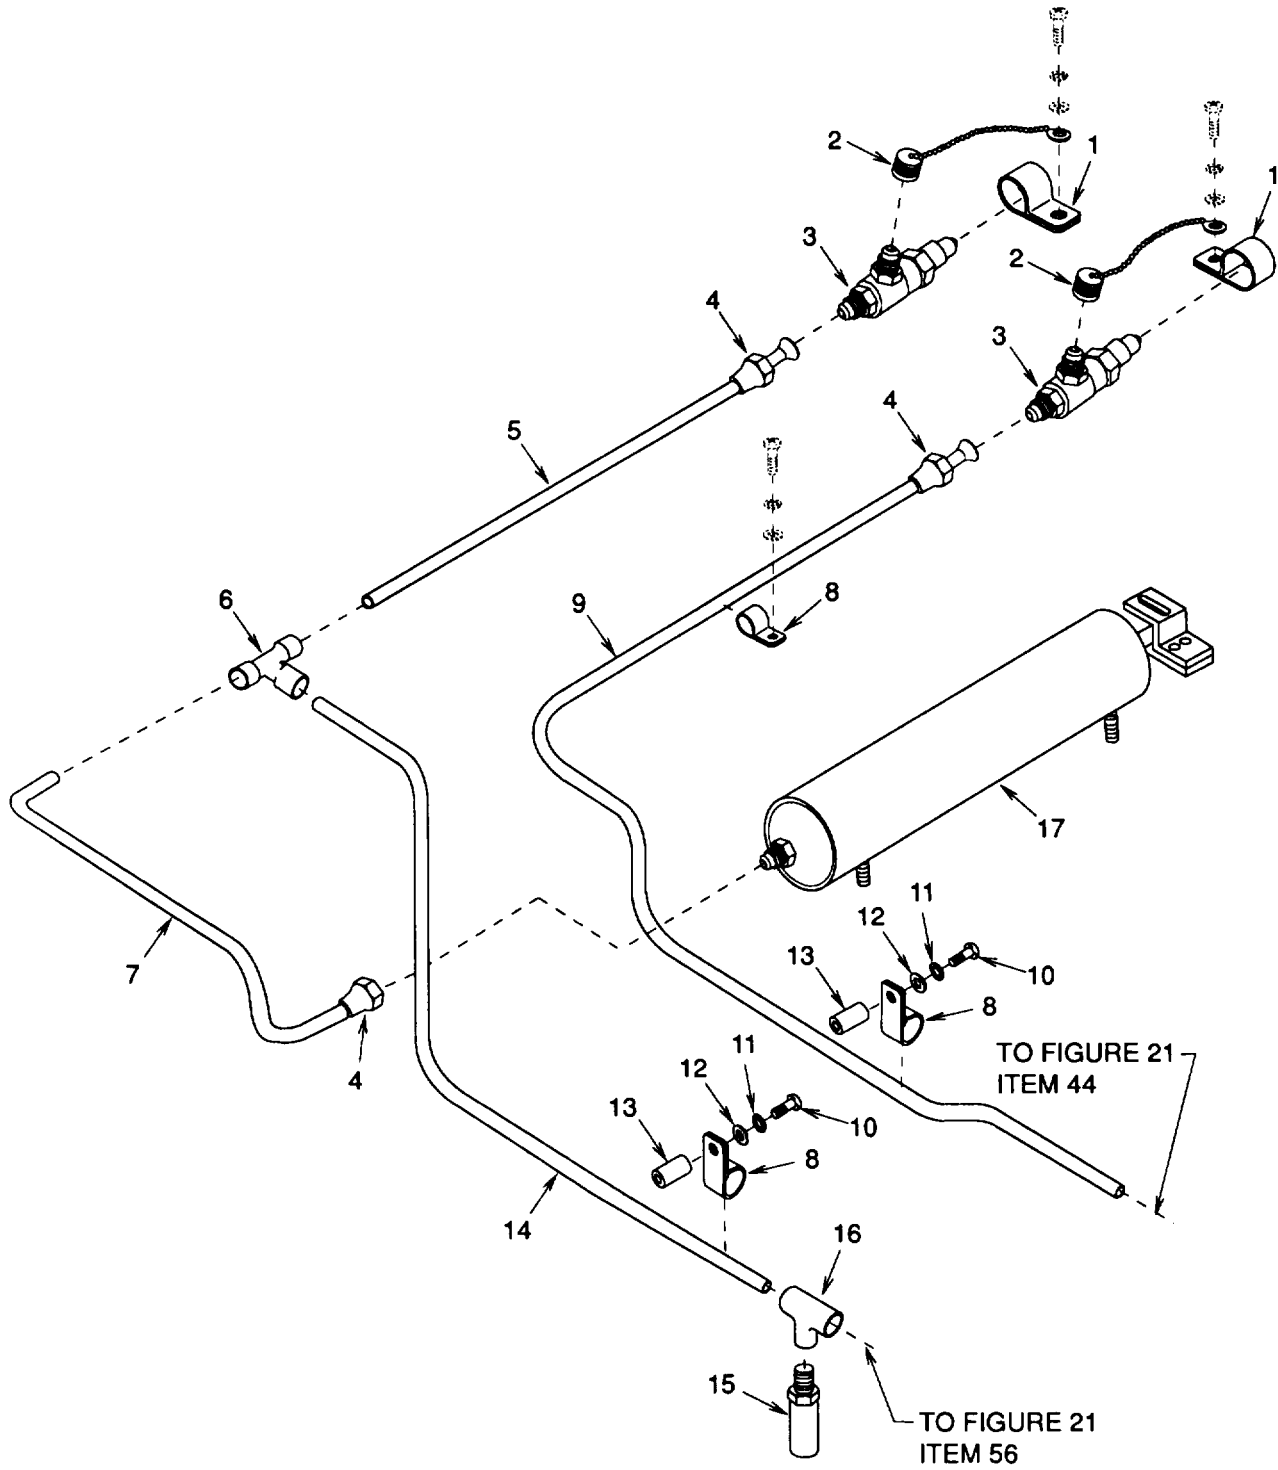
Charging Valves, Relief Valve, and Actuating Cylinder
